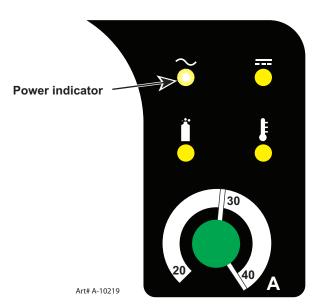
Front Panel with Power ON/OFF Indicator
